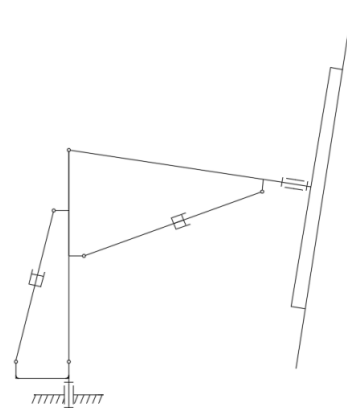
Sketch of the movement of the mechanism well dressing machine's pipe grasping robot arm
